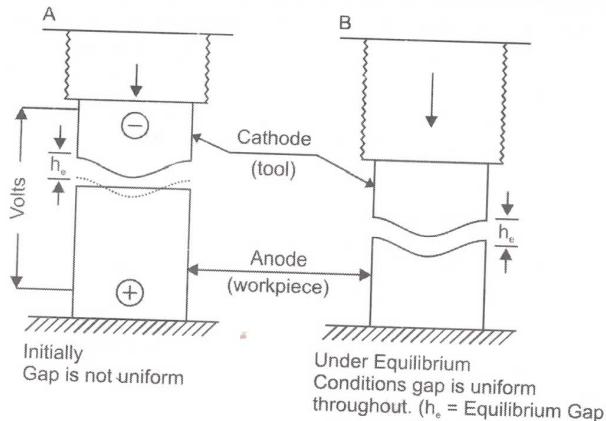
Shaped tool approaching a plain workpiece. Initially, at different sections of the gap, the machining is not in equilibrium. At some points the working gap is smaller than the equilibrium gap. The tendency at these points is for metal to be removed faster from the workpiece to approach the equilibrium gap. At other points the gap is larger than the equilibrium gap and less metal is removed from the anode at these regions. The final result will be as in B. Once this point has been reached the gap is uniform across the Cathode (and this gap is called equilibrium gap). Under equilibrium conditions machining rate is same at all points across the gap. If the tool is fed down further, the same shape will be produced on the workpiece.
